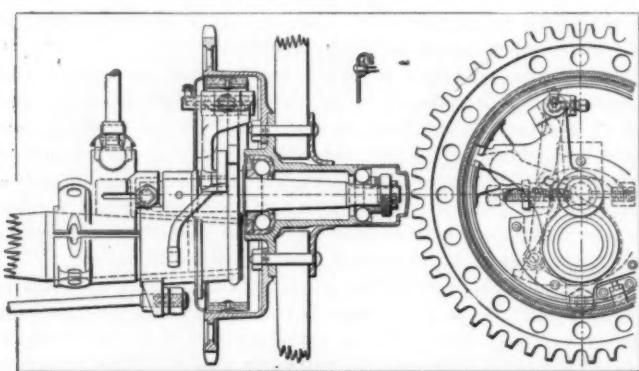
Rear wheel, sprockets, brakedrum, showing ball bearings, and system of protection against silt of the road
